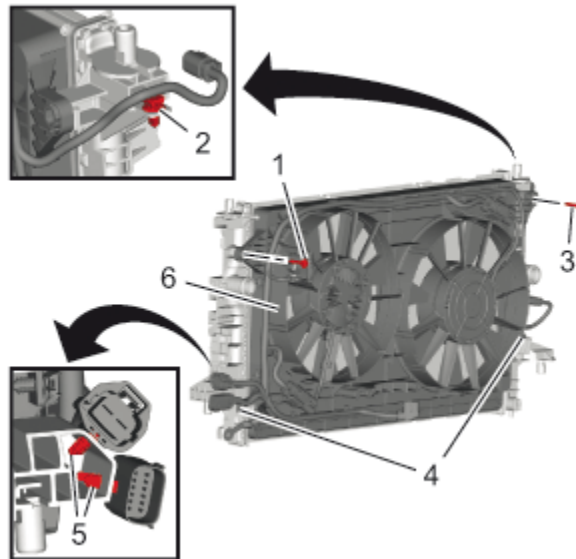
Wiring Harness Clip And Engine Coolant Fan Shroud Bolt
